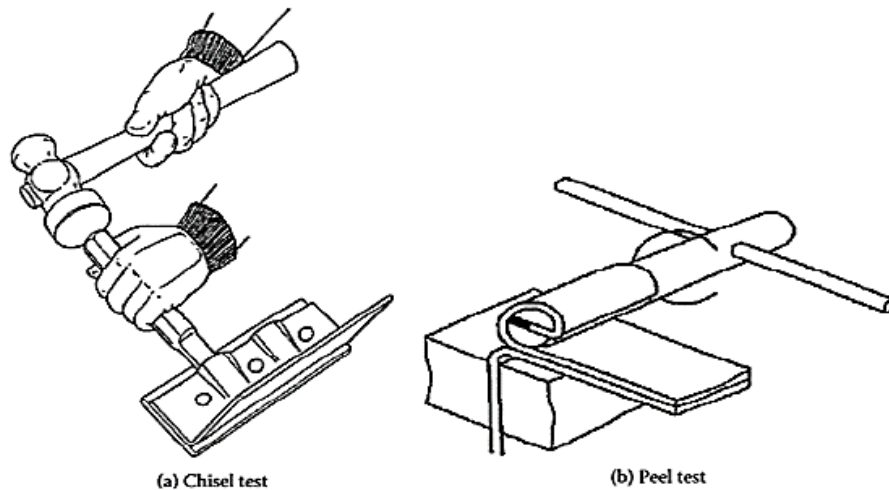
a) Chisel test and b) peel test to verify nugget sizes of a resistance spot welding joint [66]
